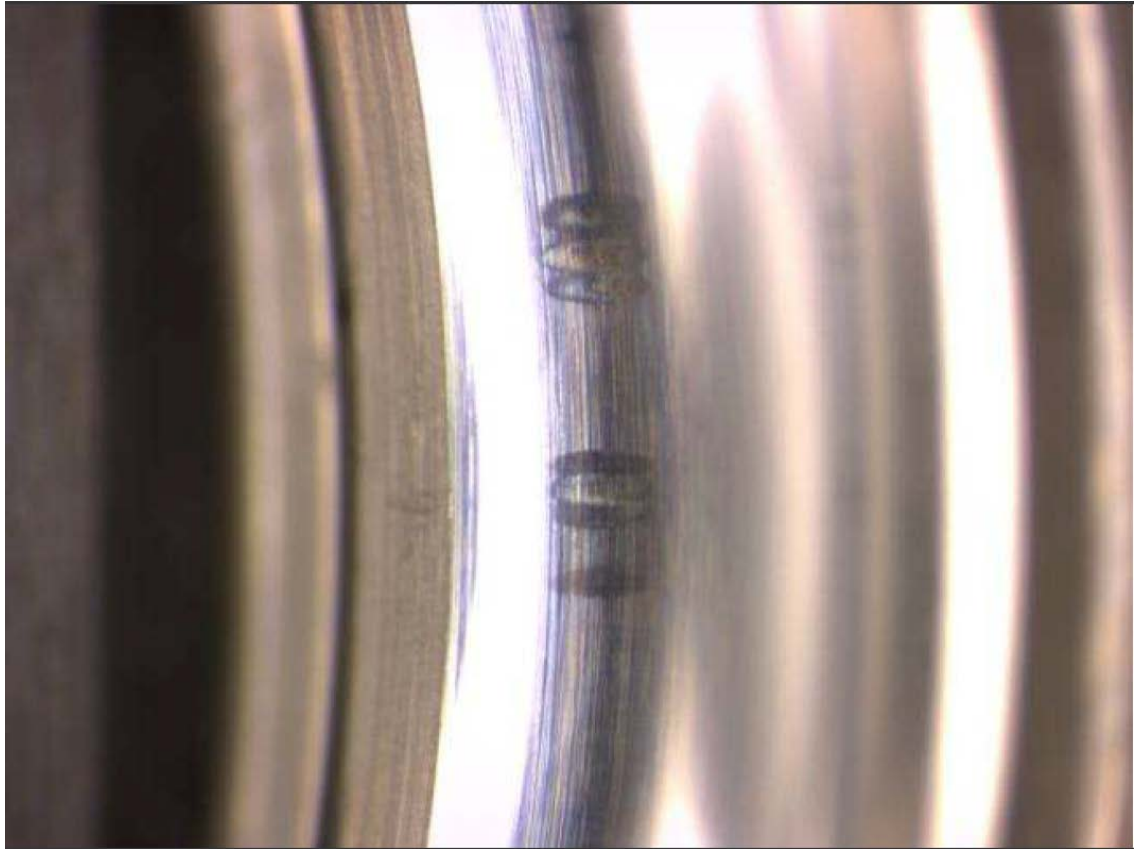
Inspection of Bearing Rings Showing Axial Brinells.
